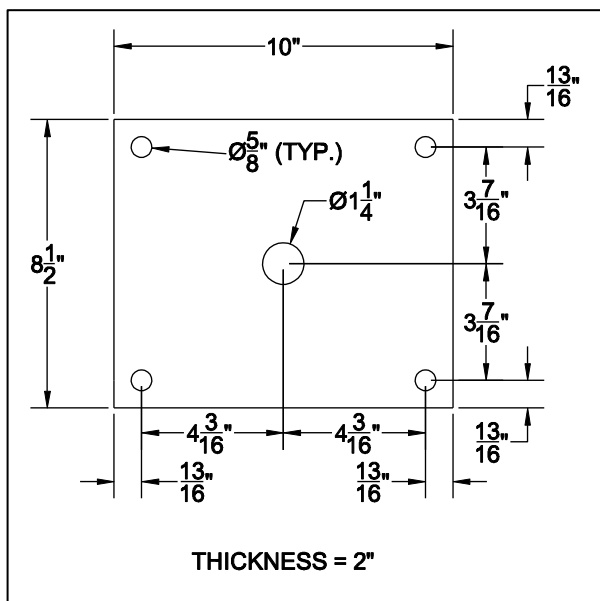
Plan view with dimensions of loading fixture plates with holes
